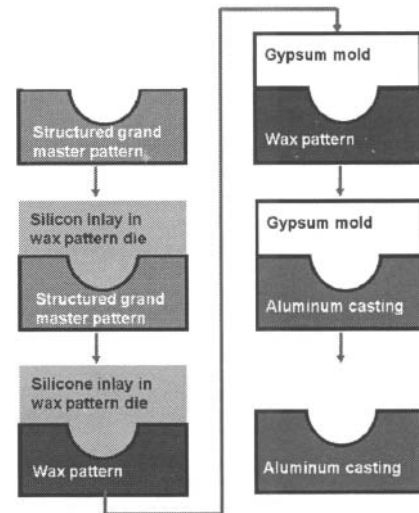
Micro casting process chain for producing a hole structure in aluminum parts
